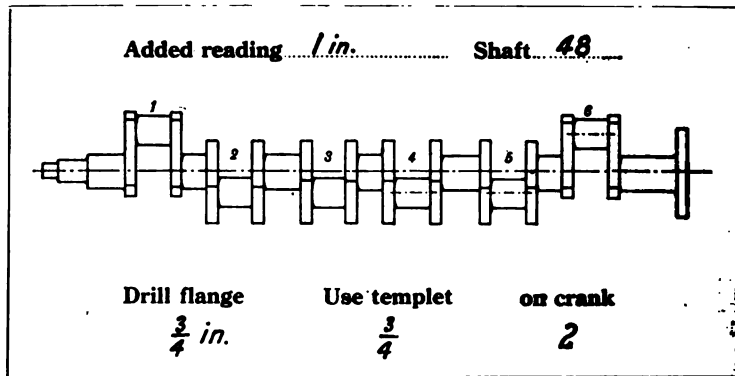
DIRECTIONS FOR BALANCING SHAFT
